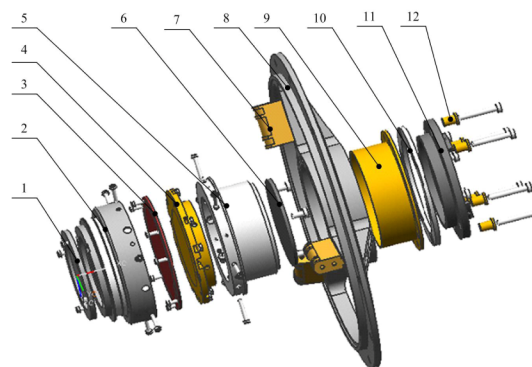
An exploded diagram of the curved MCP photon-counting detector with an induced charge WSA. Where: 1. Al film filter, 2. Kovar-alumina brazed body assembly containing MCP stacks, 3. Induced charge WSA, 4. Polyimide support bracket for fixing induced charge
